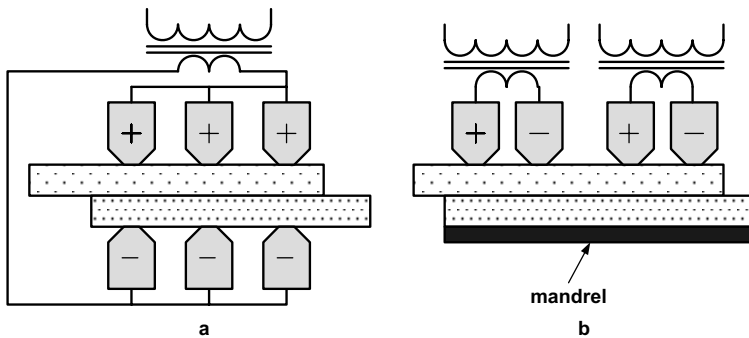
Arrangements of the secondary circuit for multiple spot welds; a - direct welding; b - series welding
